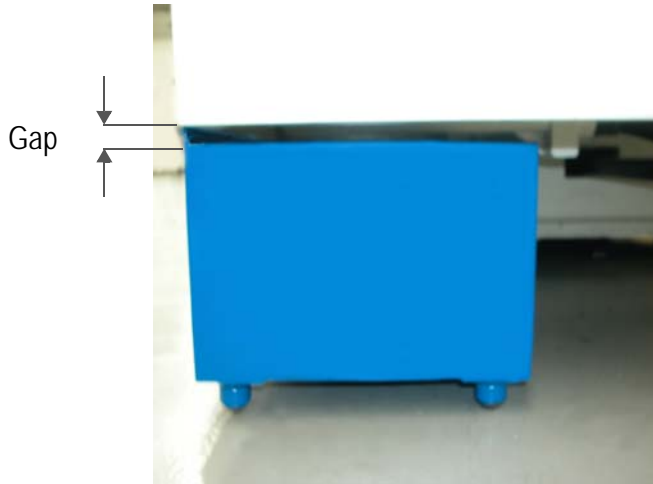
Conveyor Against Left Side of Sheet Metal
